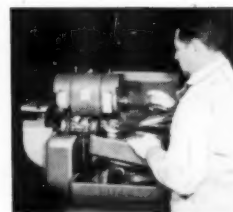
Heald Model 4 Tool Sharpening Machine arranged for precision grinding of true-radius tool point.
